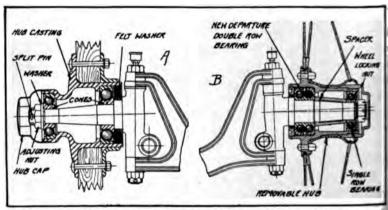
Illustrating Two Methods of Mounting Front Wheel Hubs on Ball Bearings. A—Cup and Cone Bearing. B—Unit Type Non-Adjustable Bearings.
